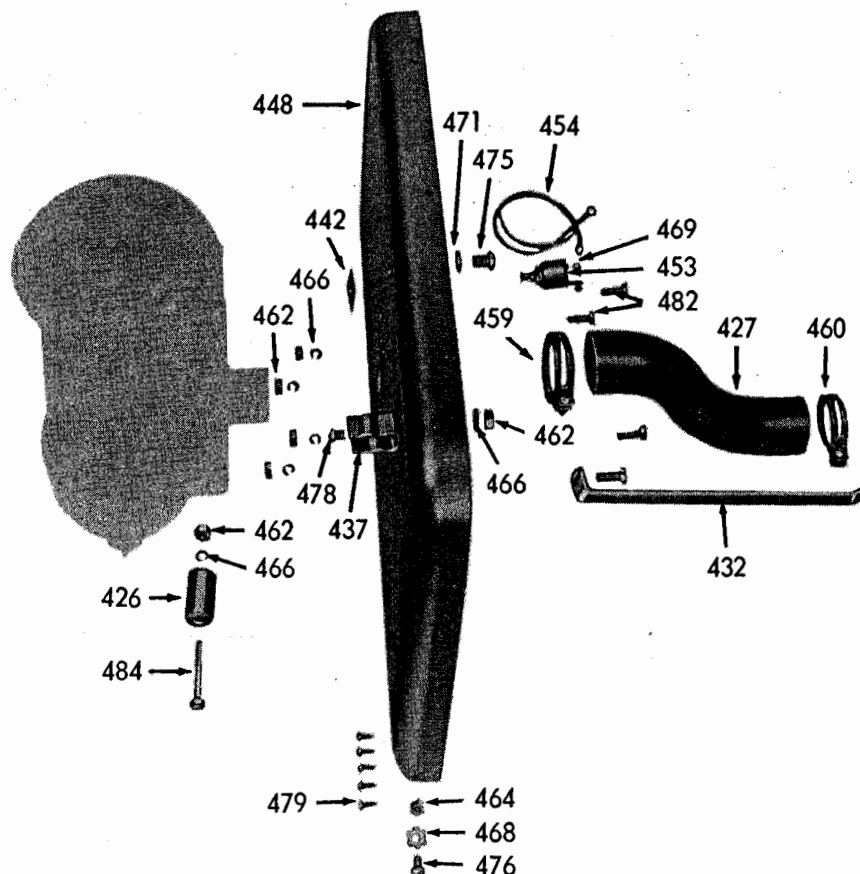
, END PANEL AND AIR CLEANER FOR ENGINE HOUSE WITH FUEL TANK AT TAKE-OFF END
